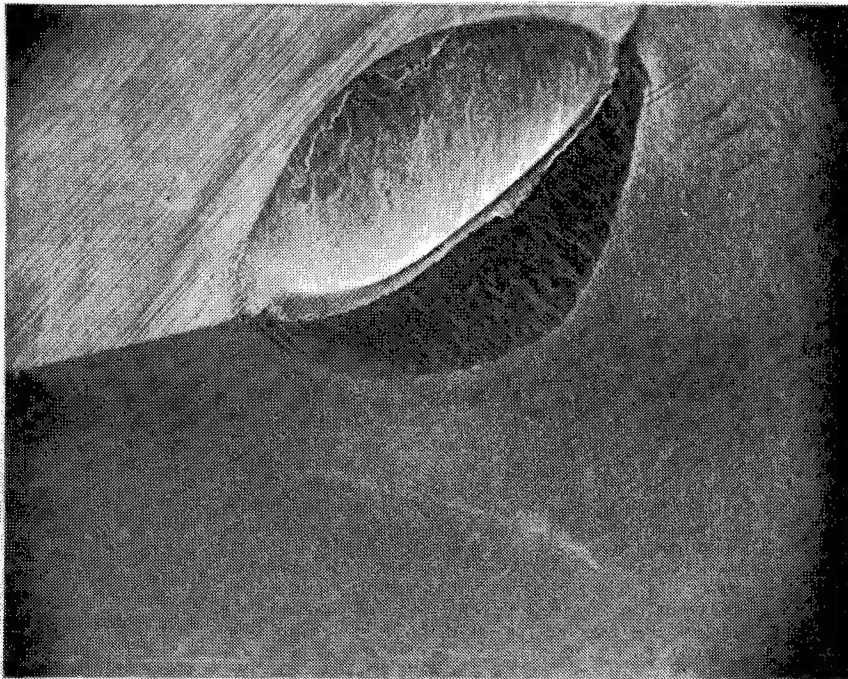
Photograph of a Typical Turning Test Tool for Fluid #4.
